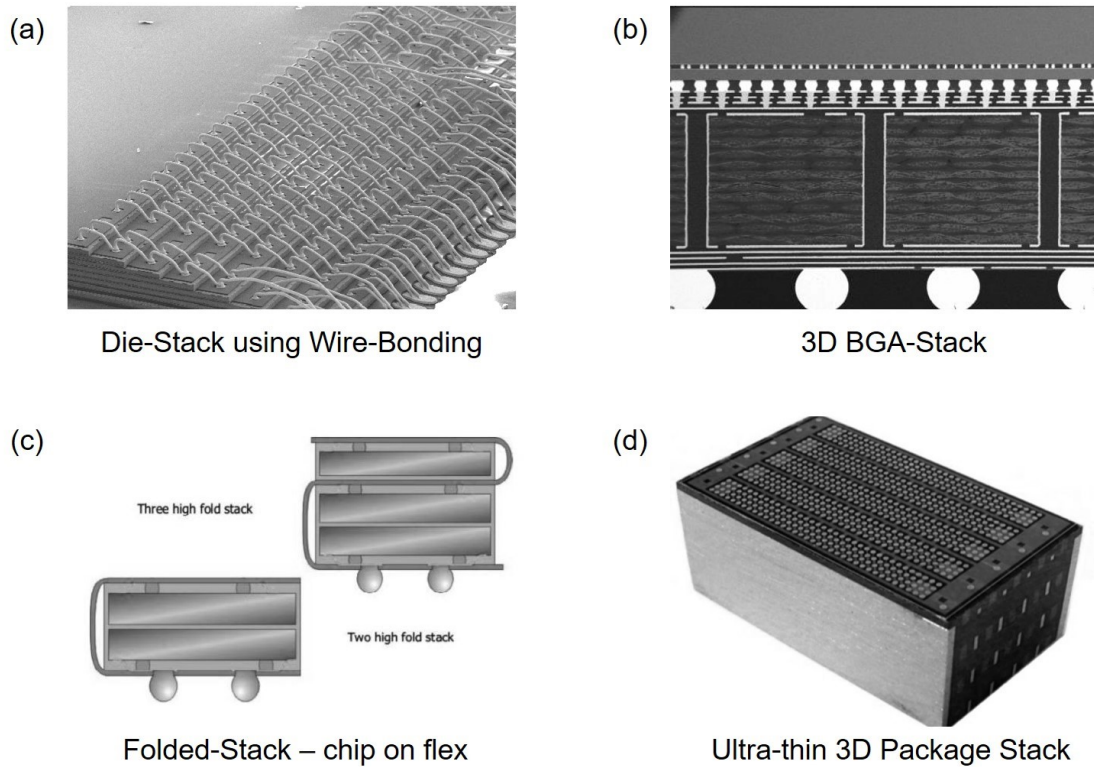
Illustration of different 3D-packaging technologies: (a) wire-bonded die-stack, (b) BGA-stack, (c) folded-stack using chip-on-flex, and (d) ultra-thin package stack.[23]
